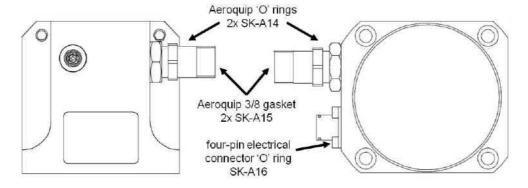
Drive Housing and Aeroquip (left) and Motor Housing with Aeroquip and four-pin electrical connector (right)
